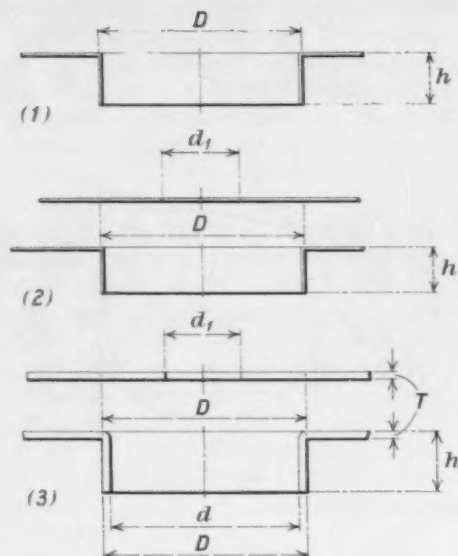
Typical components with extruded holes denoting the factors to be considered when designing the necessary tooling.
